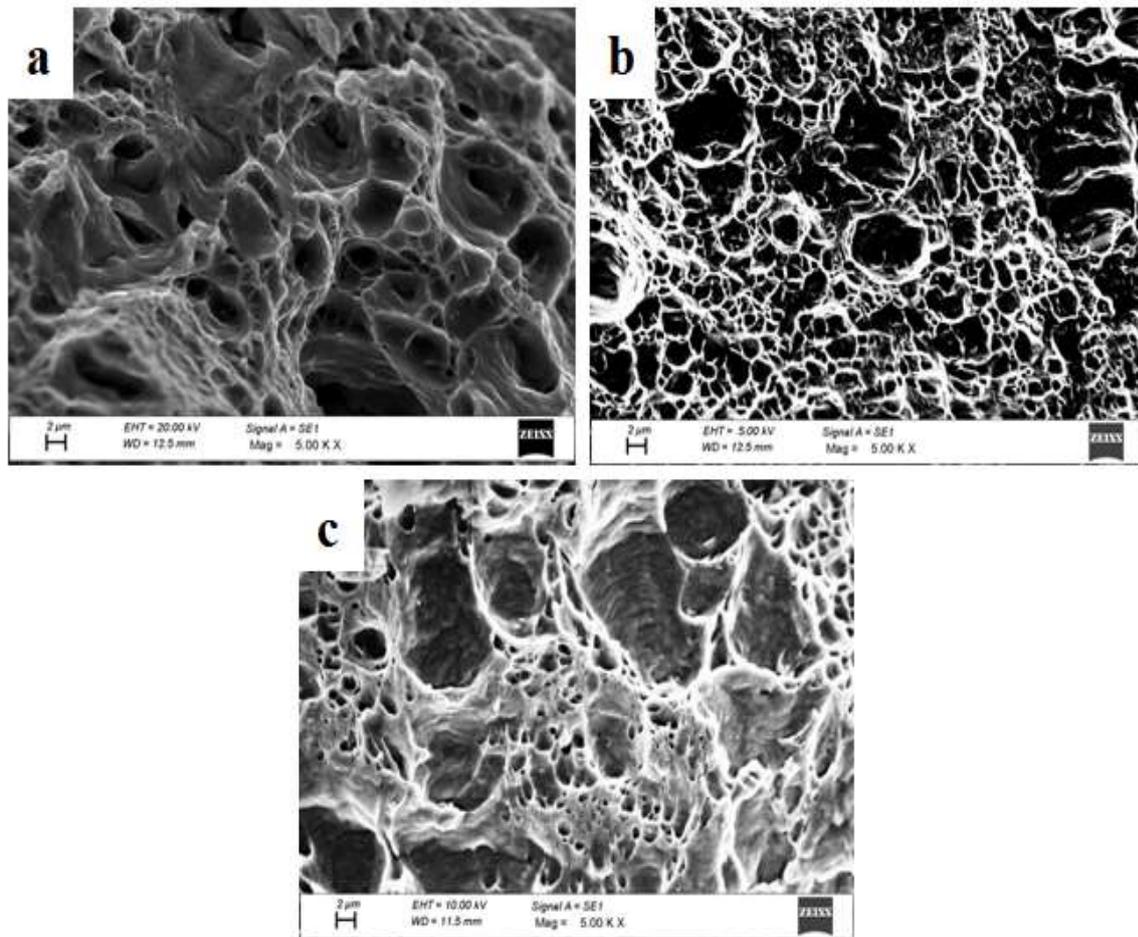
Fractography (a) AA5083 Base Material (b) AA5754 Base Material (c) Welded sample
